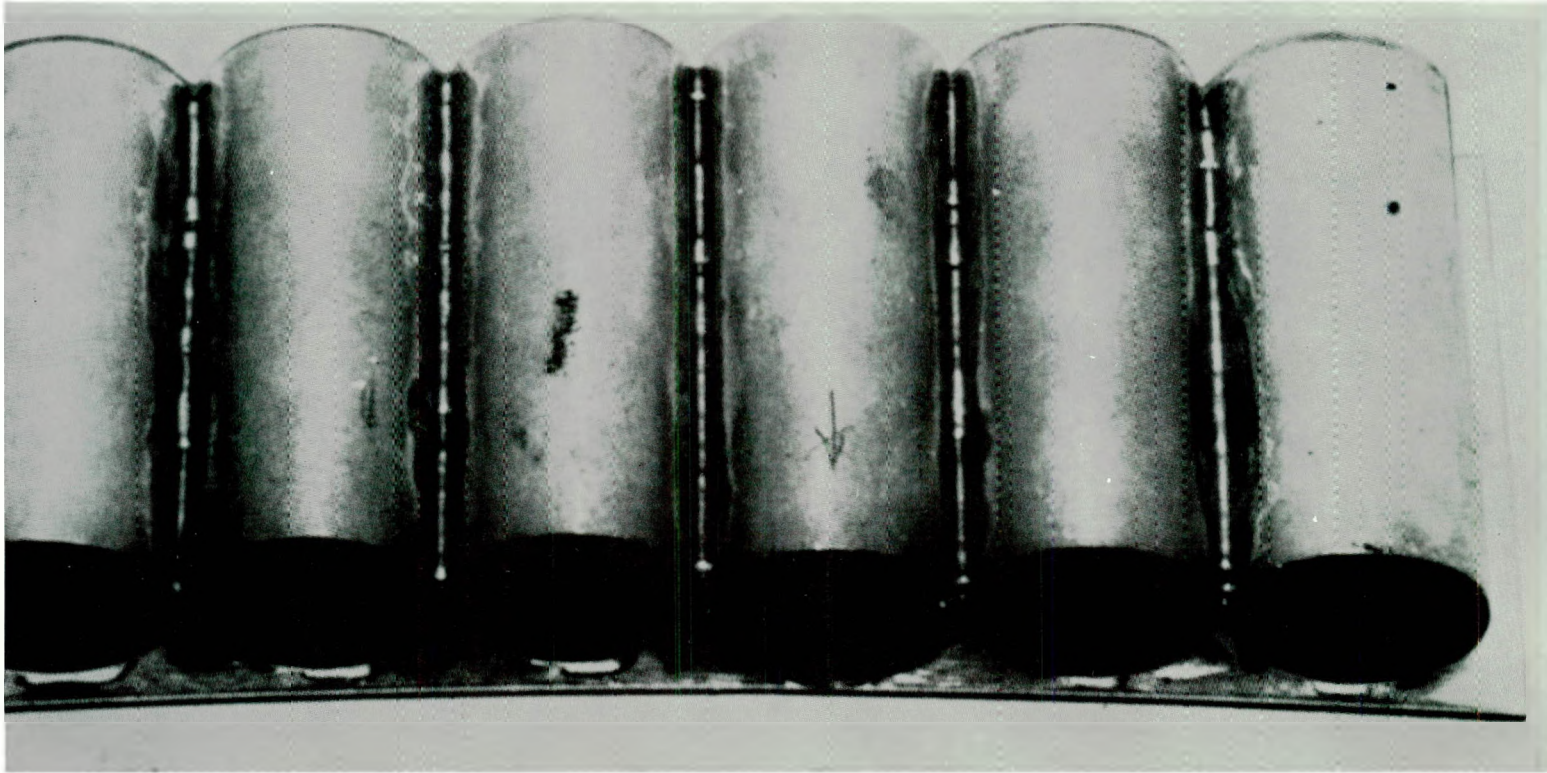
MISSILE ASSEMBLY USED WITH RED FUMING NITRIC ACID
